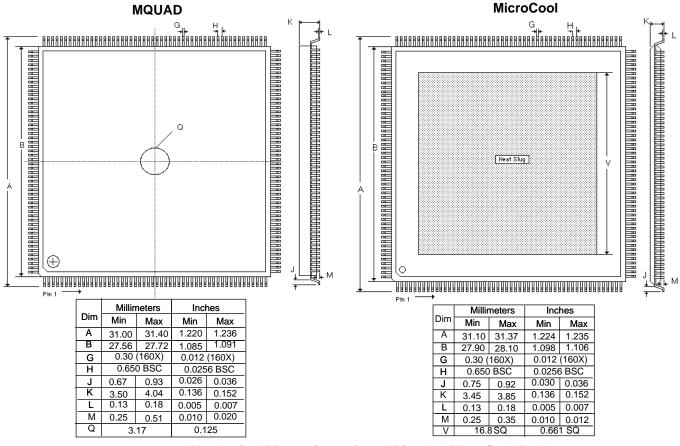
Mechanical Dimensions of 160 MQuad & MicroCool Packages
